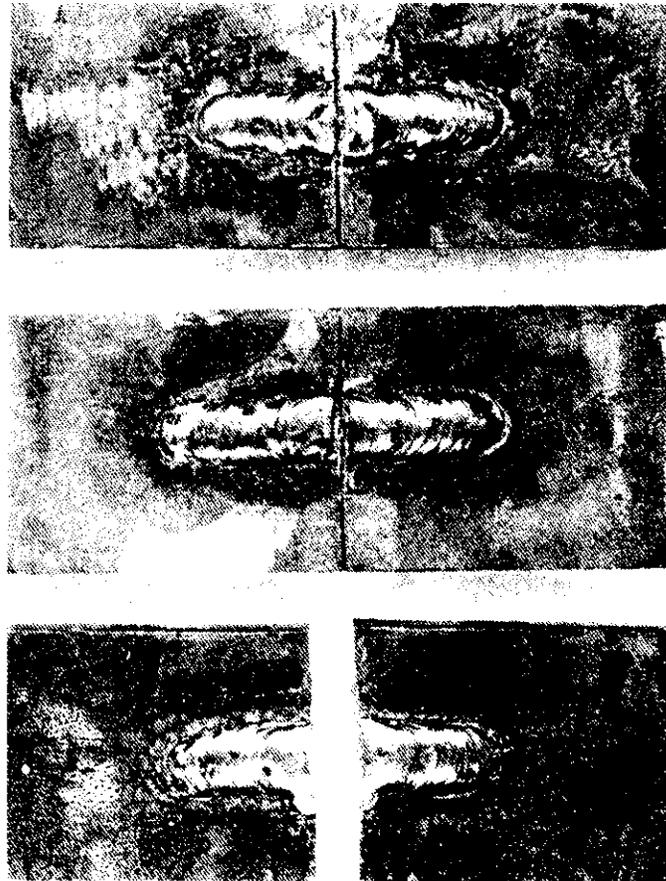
Typical Examples of Broken Drop-Weight Specimens. Fracture Reaches to at Least One Edge.
